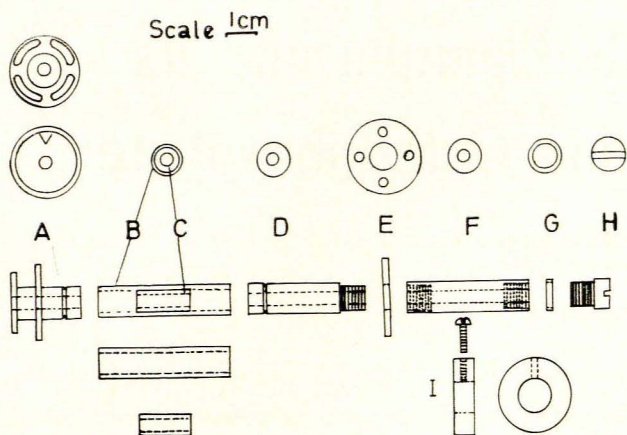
Component parts of cannula: A — acrylic resin internal end; B — outer silicone rubber tube; C — inner silicone rubber tube; D — acrylic resin portion of shaft; E — perforated washer; F — stainless steel shaft; G — washer (acrylic resin); H — end screw; I — bite block.
